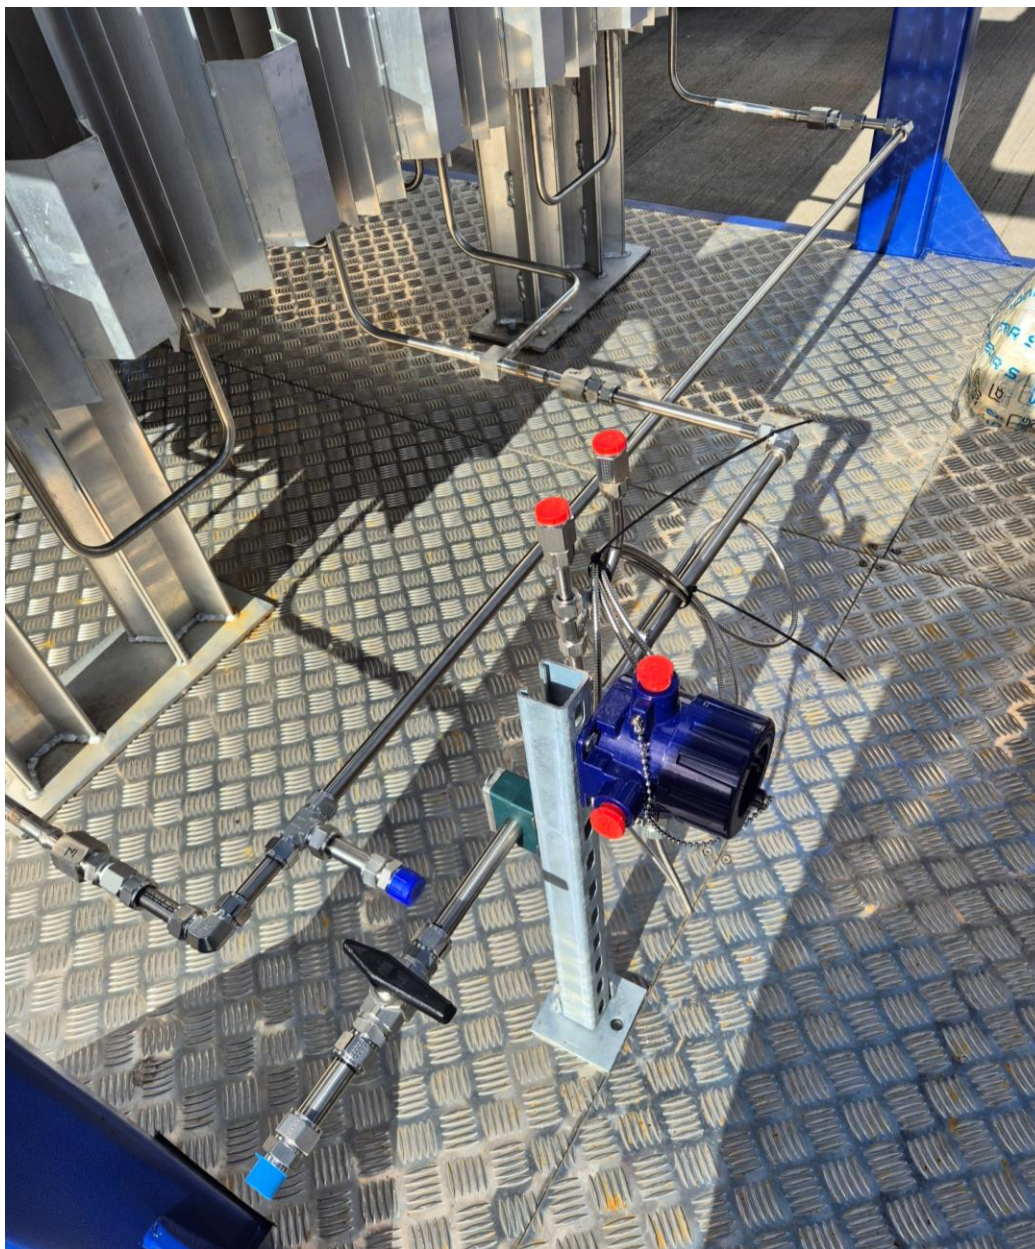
Unitrove LH₂ Storage Skid Assembly-Manufactured Pipe work and valves
